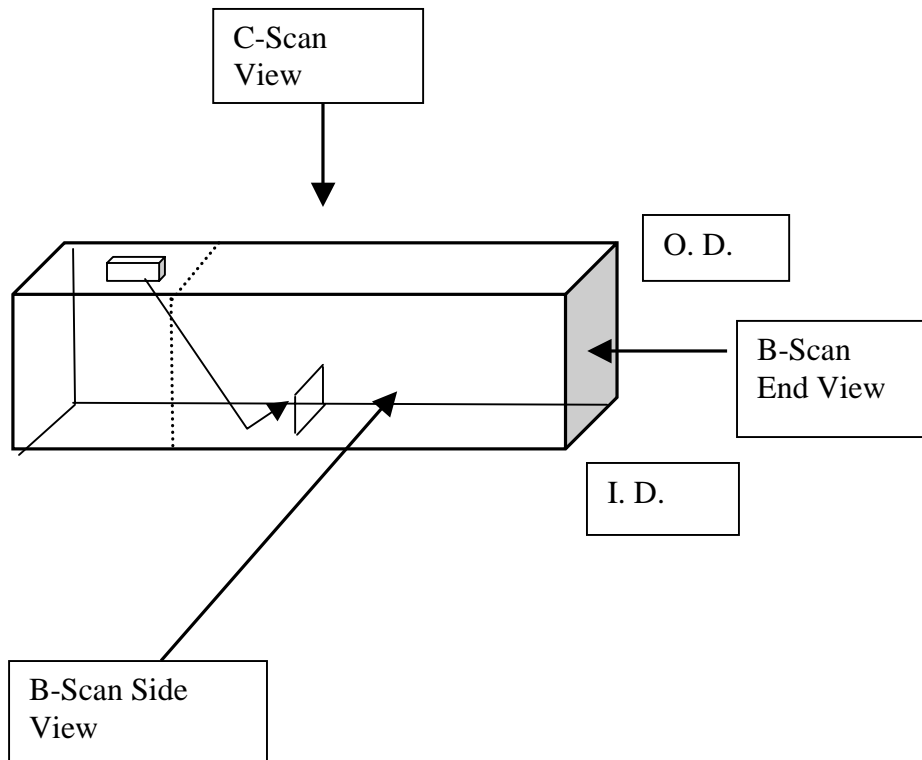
Three possible views of a flaw in the mockup SAFT data are shown. The transducer is scanning left of the weld and the part contains a flaw on the inner diameter surface.
